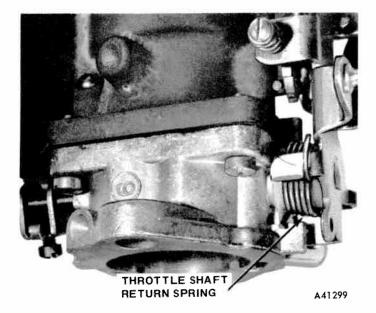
Throttle Shaft Return Spring-Model YF Carburetor
